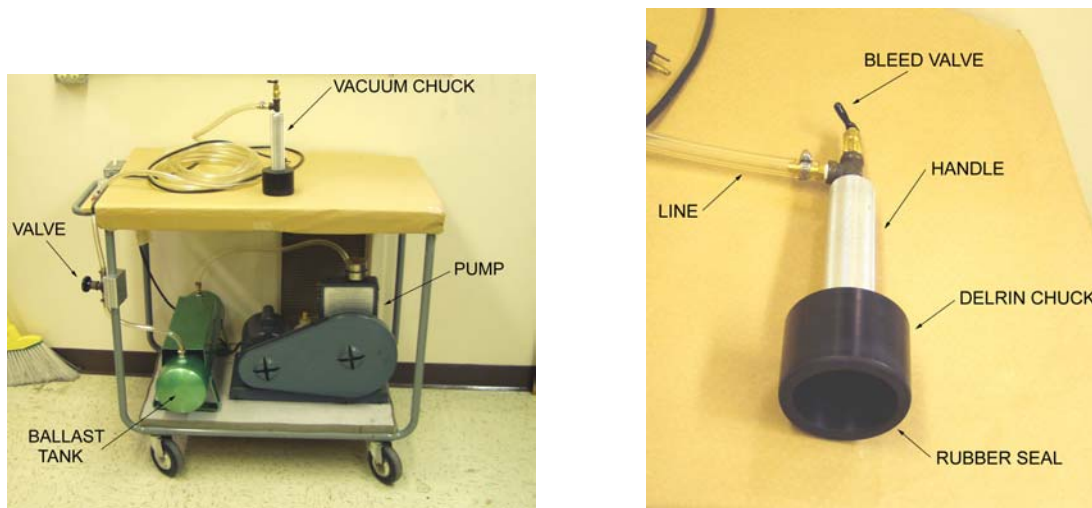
Left: Vacuum chuck used at NOAO, with mechanical pump, ballast tank, and valve with pressure gauge. Right: Closeup of vacuum chuck
